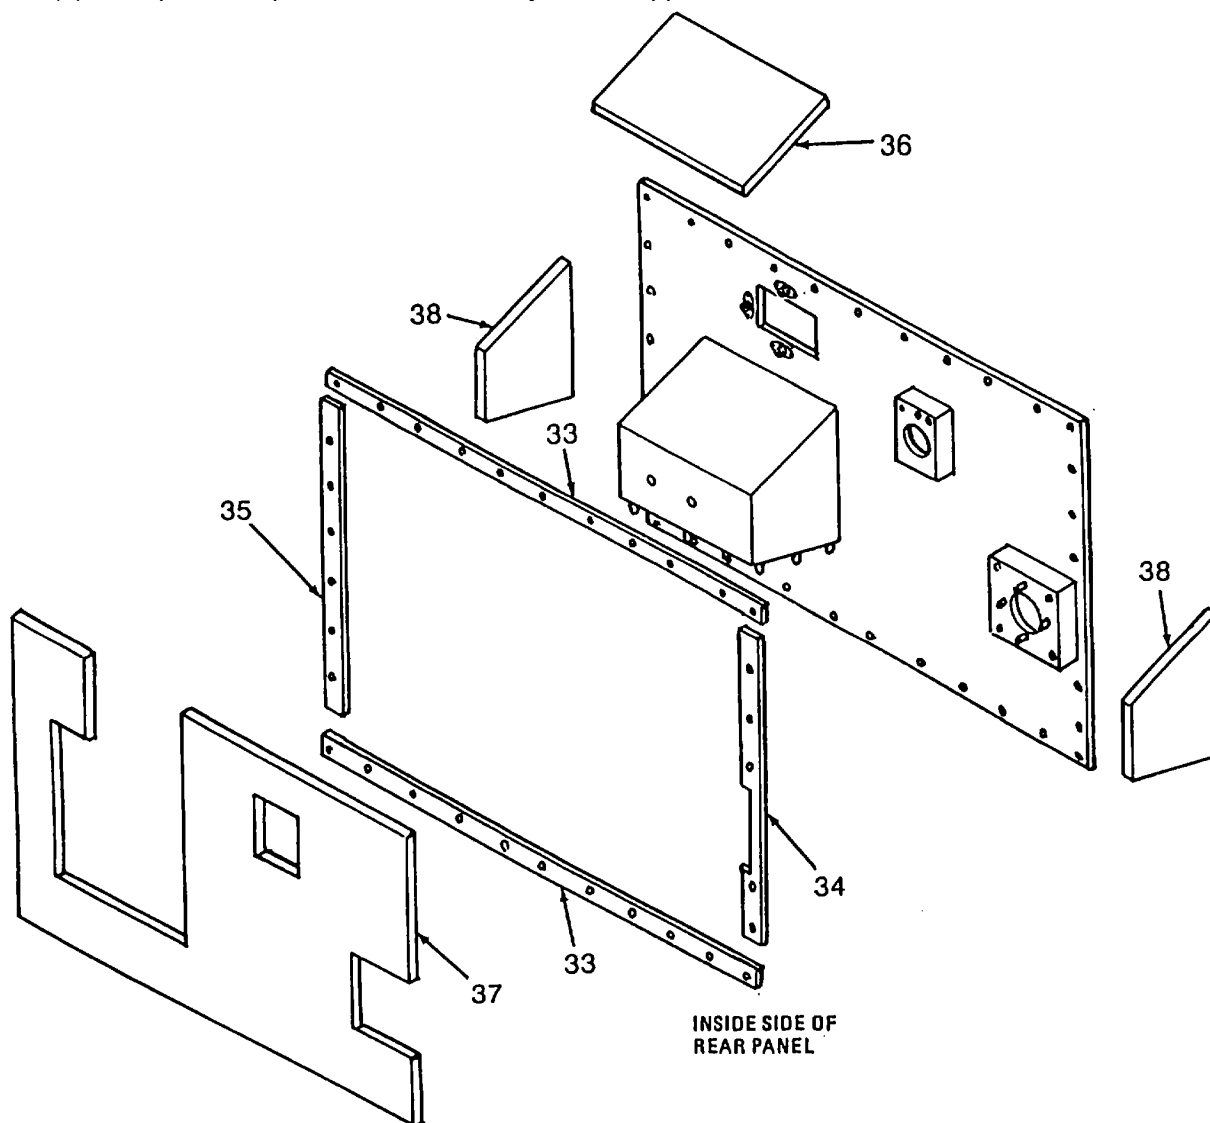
Rear Panel Disassembly (Sheet 2 of 3)
